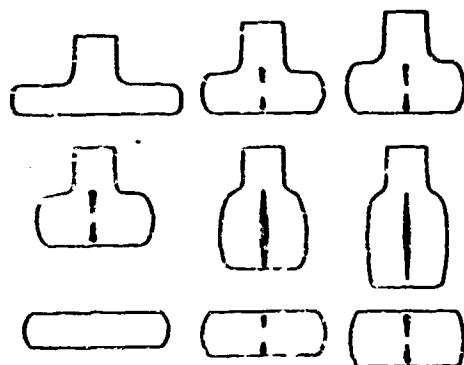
Diagrams showing sealing of axial defects during upsetting of blanks with different shapes.
